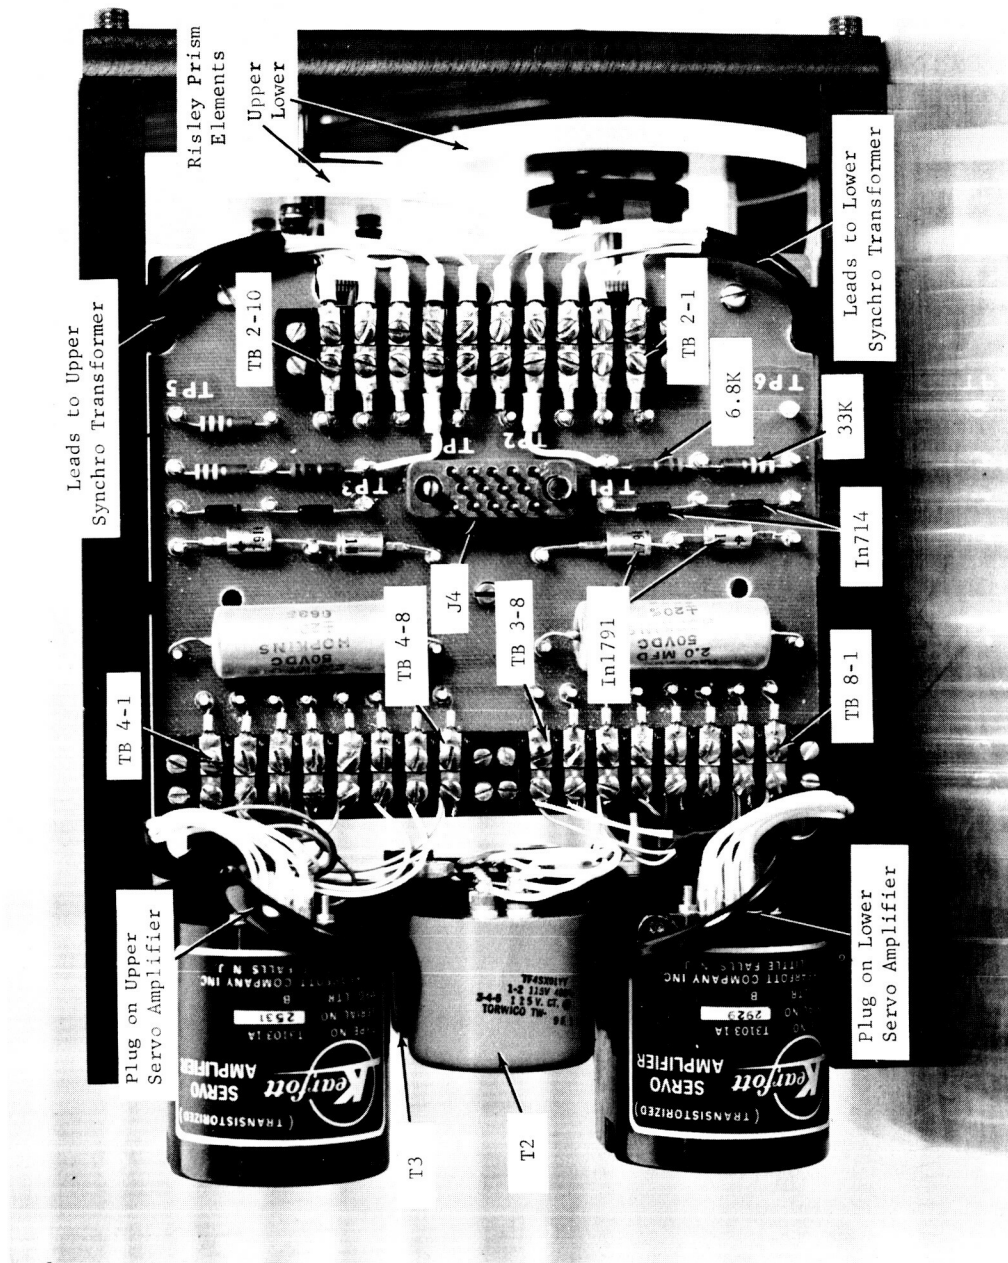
Optical and Mechanical Subassembly Circuit Board
